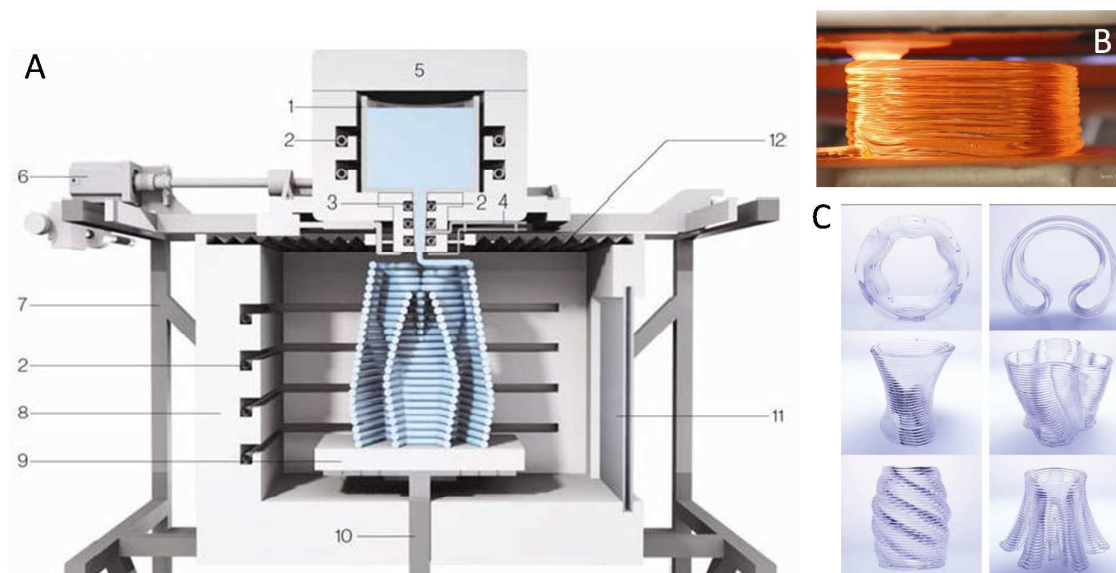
A) Rendered cross section of system showing the printer during fabrication. Detailed elements are: (1) crucible, (2) heating elements, (3) nozzle and (4) thermocouple, (5) removable feed access lid, (6) stepper motors, (7) printer frame, (8) print annealer, (9) ceramic print plate, (10) z-drive train, (11) ceramic viewing window, and (12) insulating skirt. B) Evolution of the printing process. C) Objects printed using the platform with various geometrical parameters. Adapted with permission from ref [12]. Copyright (2015) Mary Ann Liebert, Inc.
